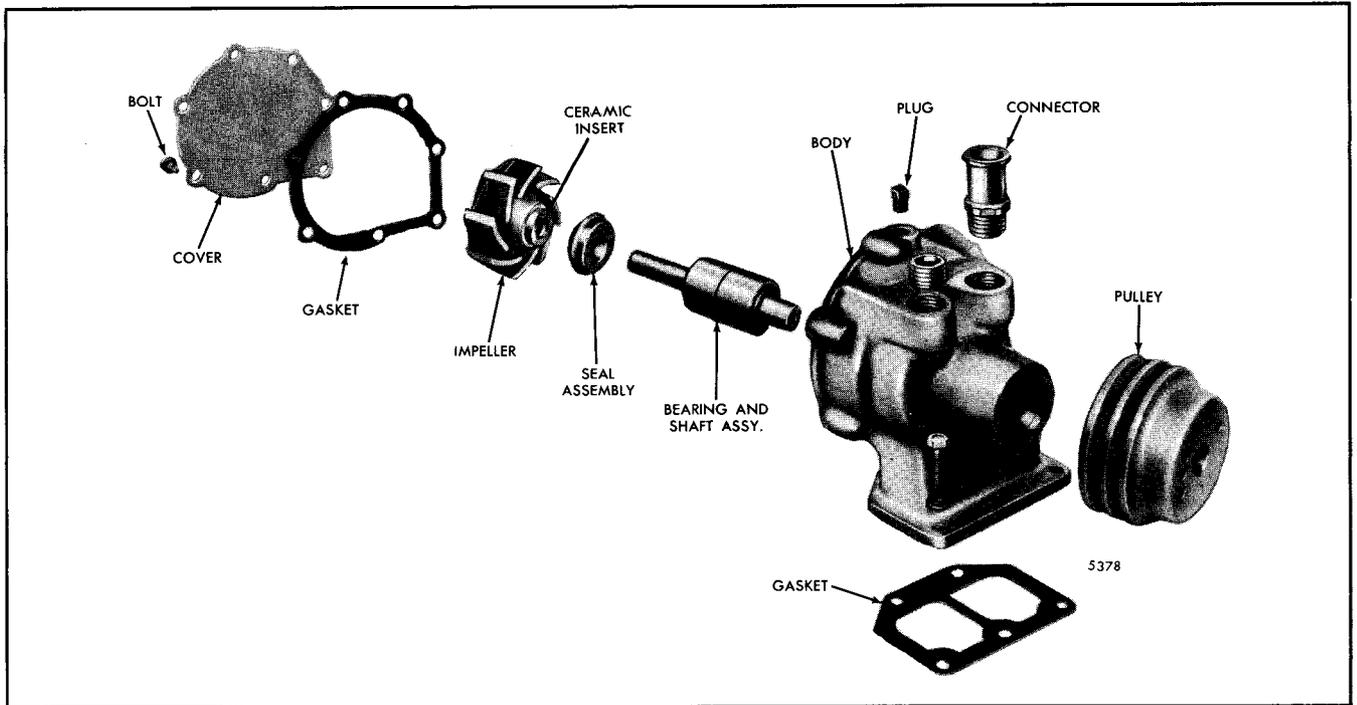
Details of Current Water Pump Assembly with Ceramic Seal
